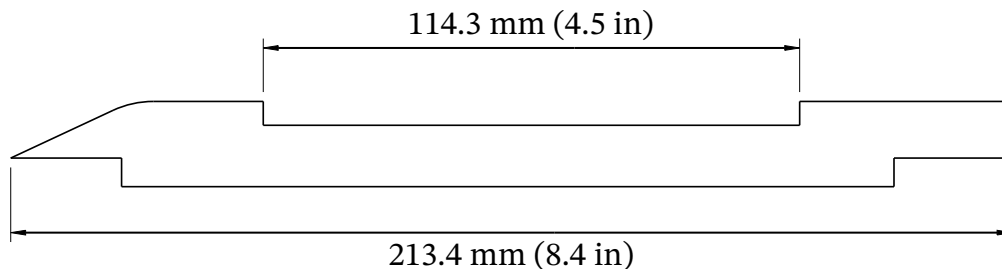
Side view of the design of the fuel holder. The width of the piece is 50.8 mm (2 in), same as that of the combustion chamber.
